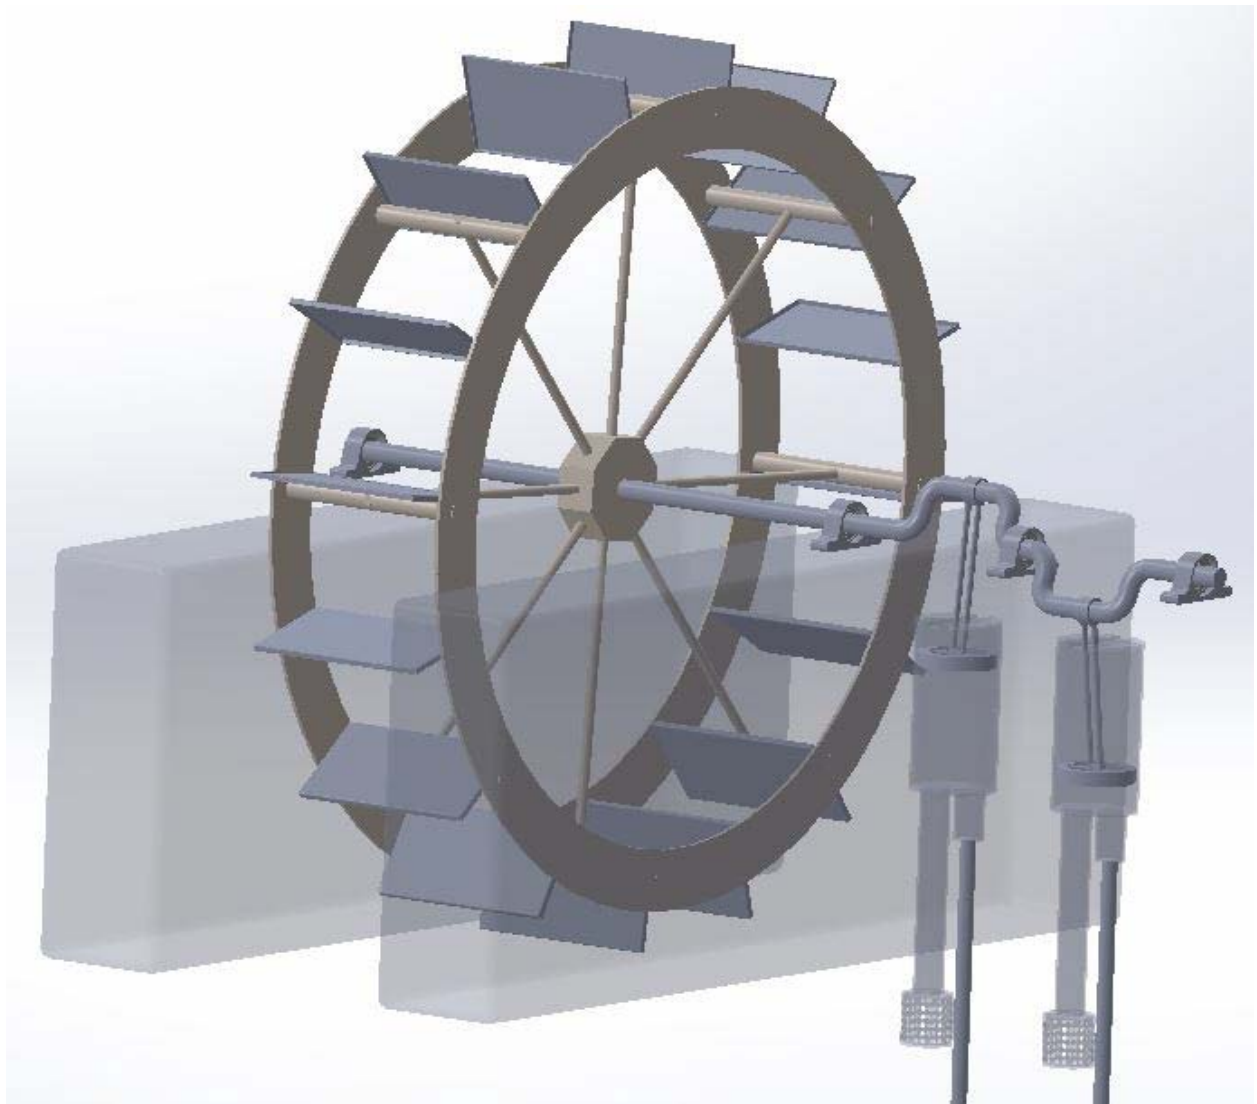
Simulation of pumps with the crank shaft and bearings.
